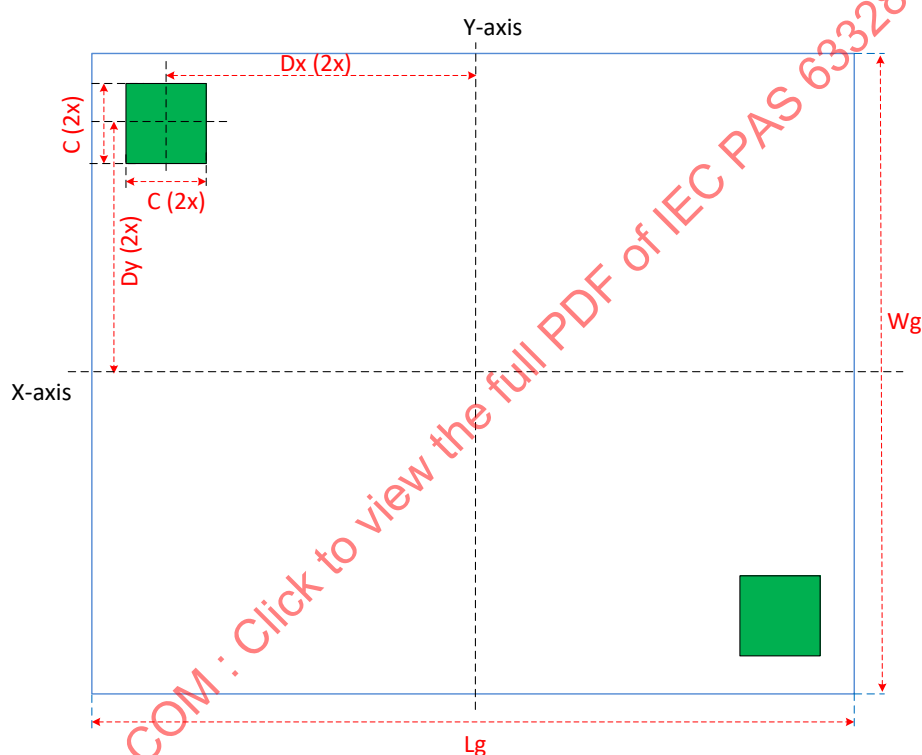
Definition of the gauges for the holder contacts compliance test
